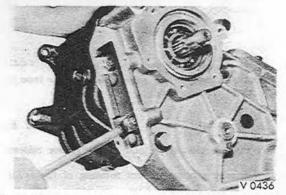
Removing the inside bolt from the power take-off cover hole.
